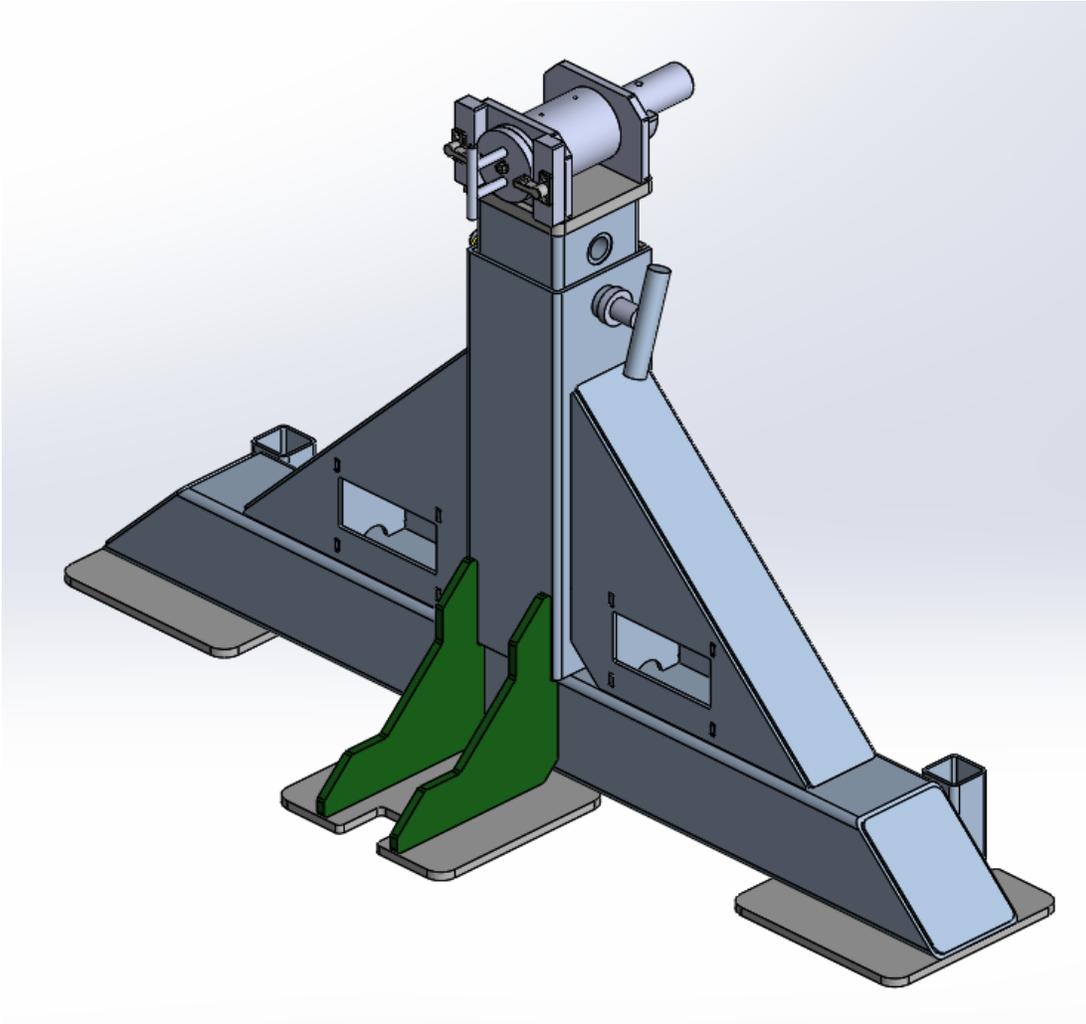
Final Design of Quick Change, Hydraulic Powered Drive End A-Stand,
